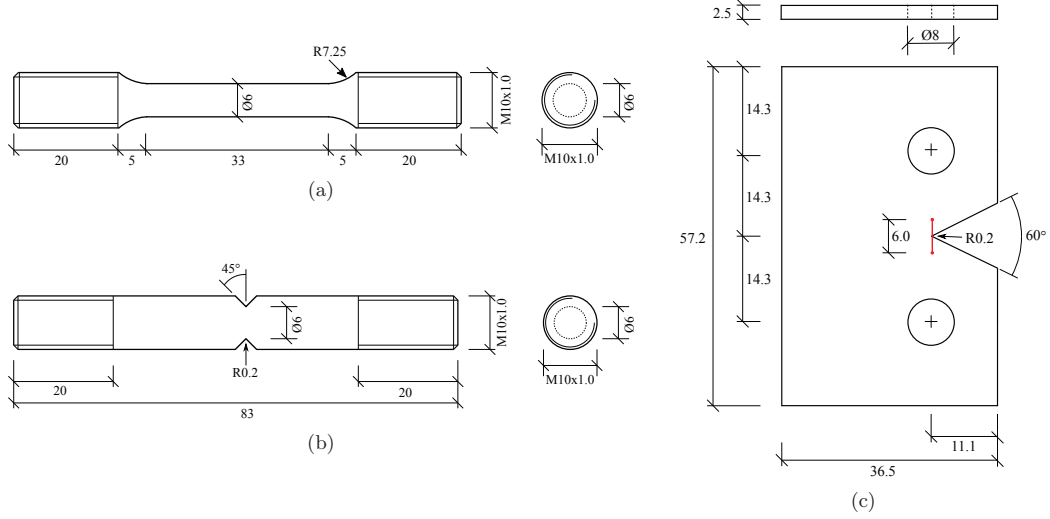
Geometry of the test specimens: (a) Smooth tensile specimen, (b) V-notch tensile specimen, and (c) Kahn tear test specimen with a red line indicating the virtual extensometer used. Dimensions in mm.
